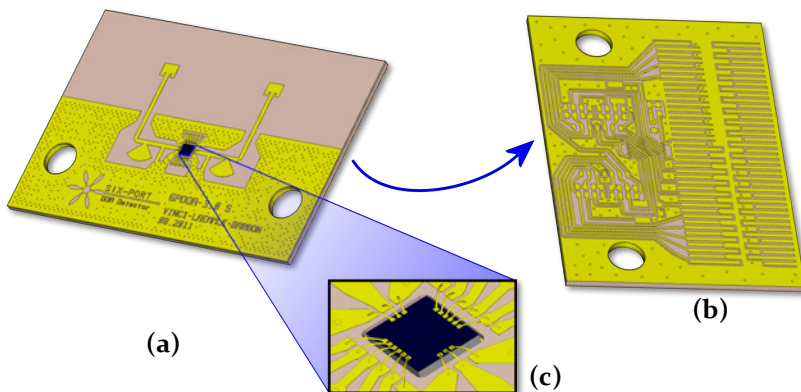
CAD model of the fabricated PCB. Top view (a), bottom view (b) and the integrated Six-Port receiver (c).
